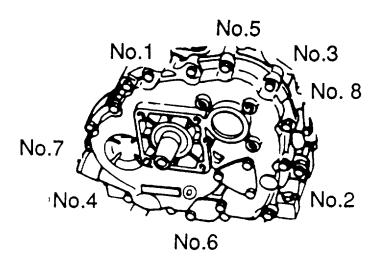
Tightening Sequence for Crankcase Cover Bolts.
